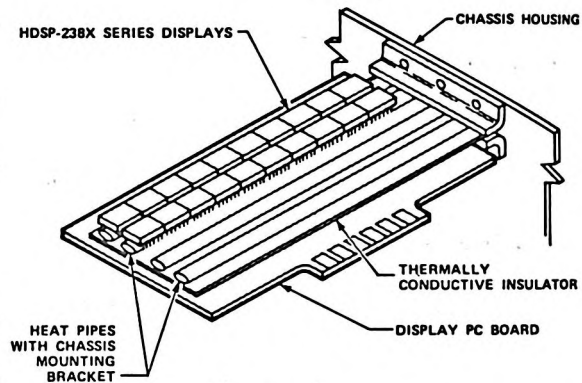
Heat Pipes Mounted Between Display Devices and PC Board, Mechanically Fastened to Chassis Housing.
